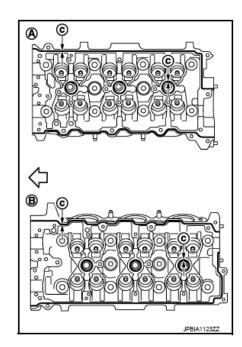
Identifying Continuous Bead Of Liquid Gasket Applying Area On VVEL Ladder Assembly
